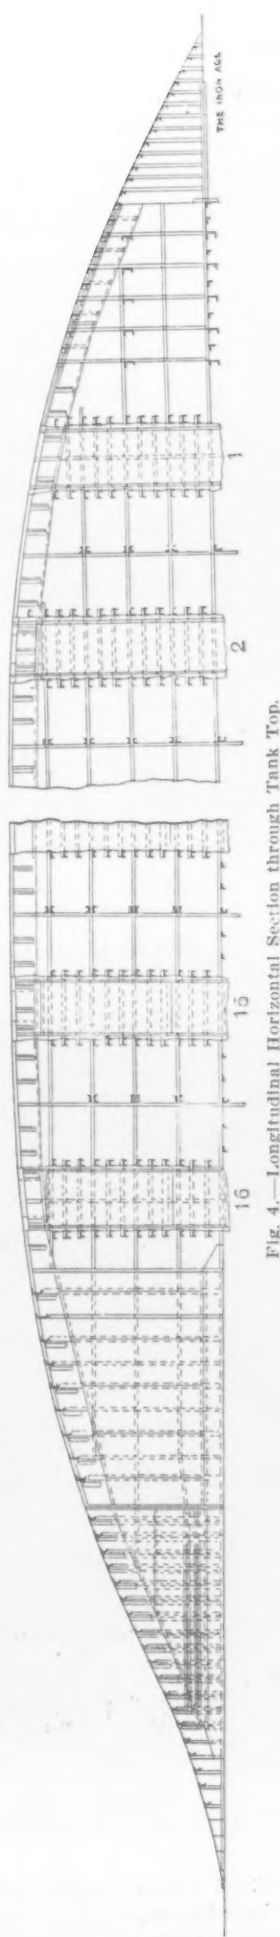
Longitudinal Horizontal Section through Tank Top.
